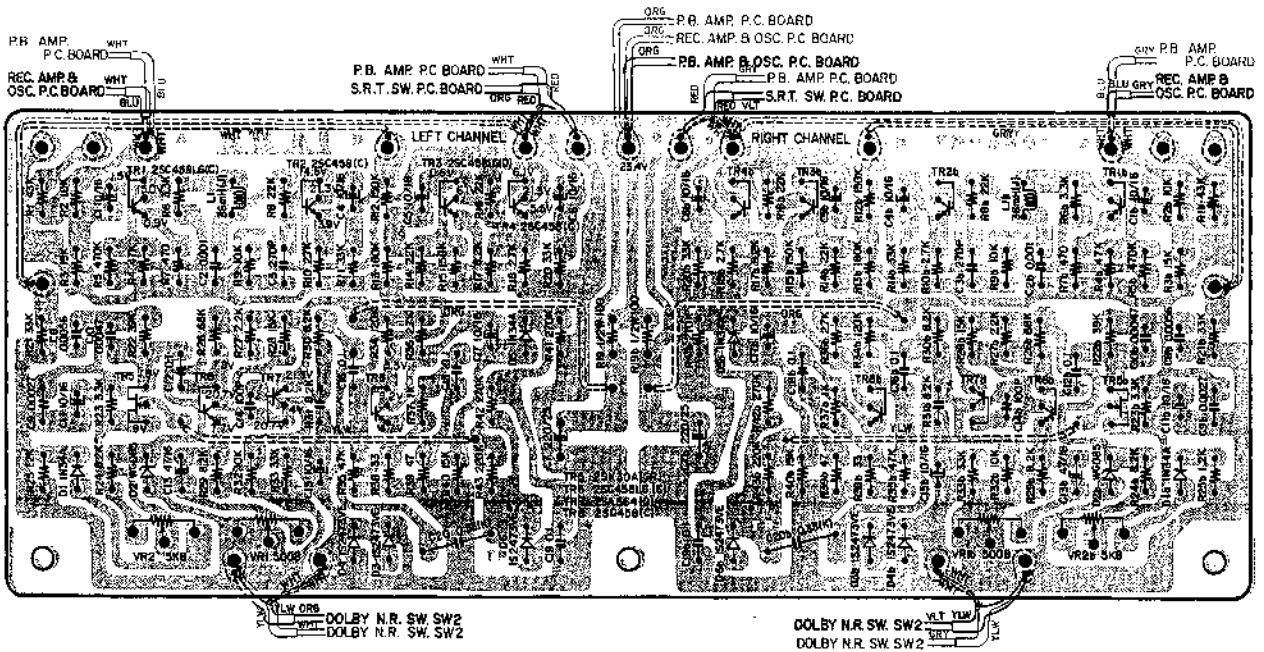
DOLBY N.R. P.C. BOARD TD-5301 (Reverse Side)
